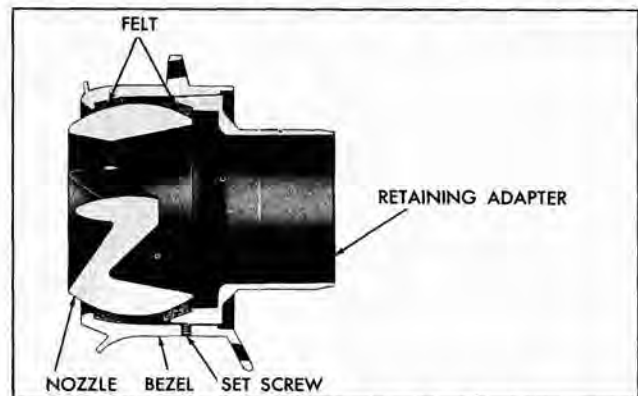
Cross Section of Bezel and Nozzle Assembly (Right Shown)
